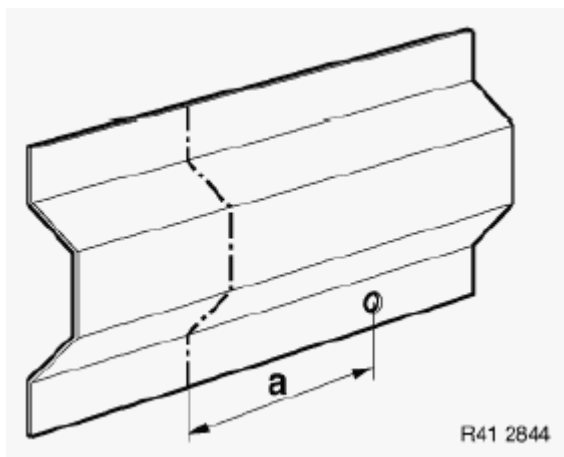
Welding In Reinforcement Plate - Mark Component In Accordance With Distance And Cut
